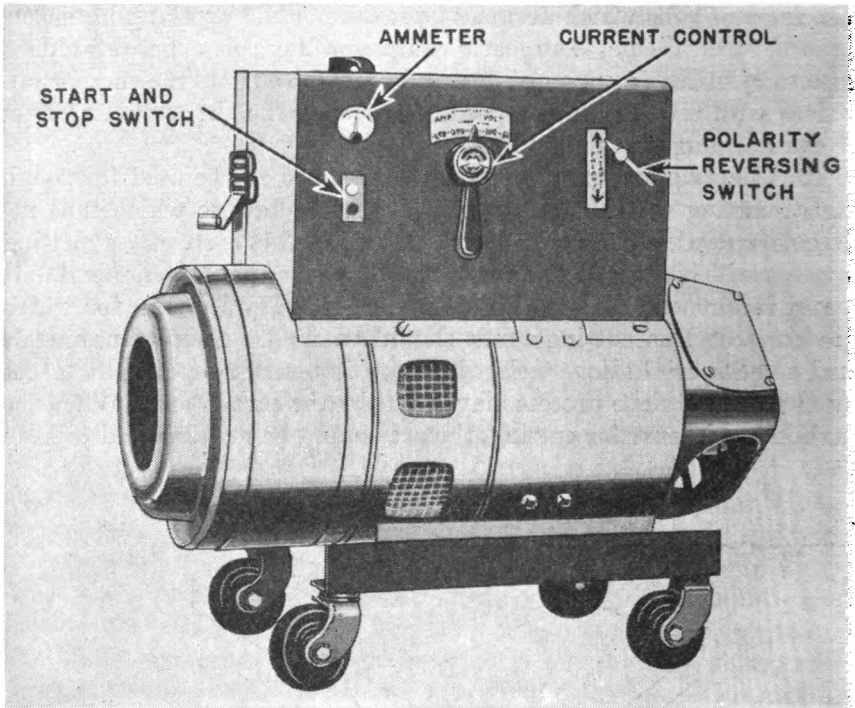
Motor-driven d. c. arc welder.
